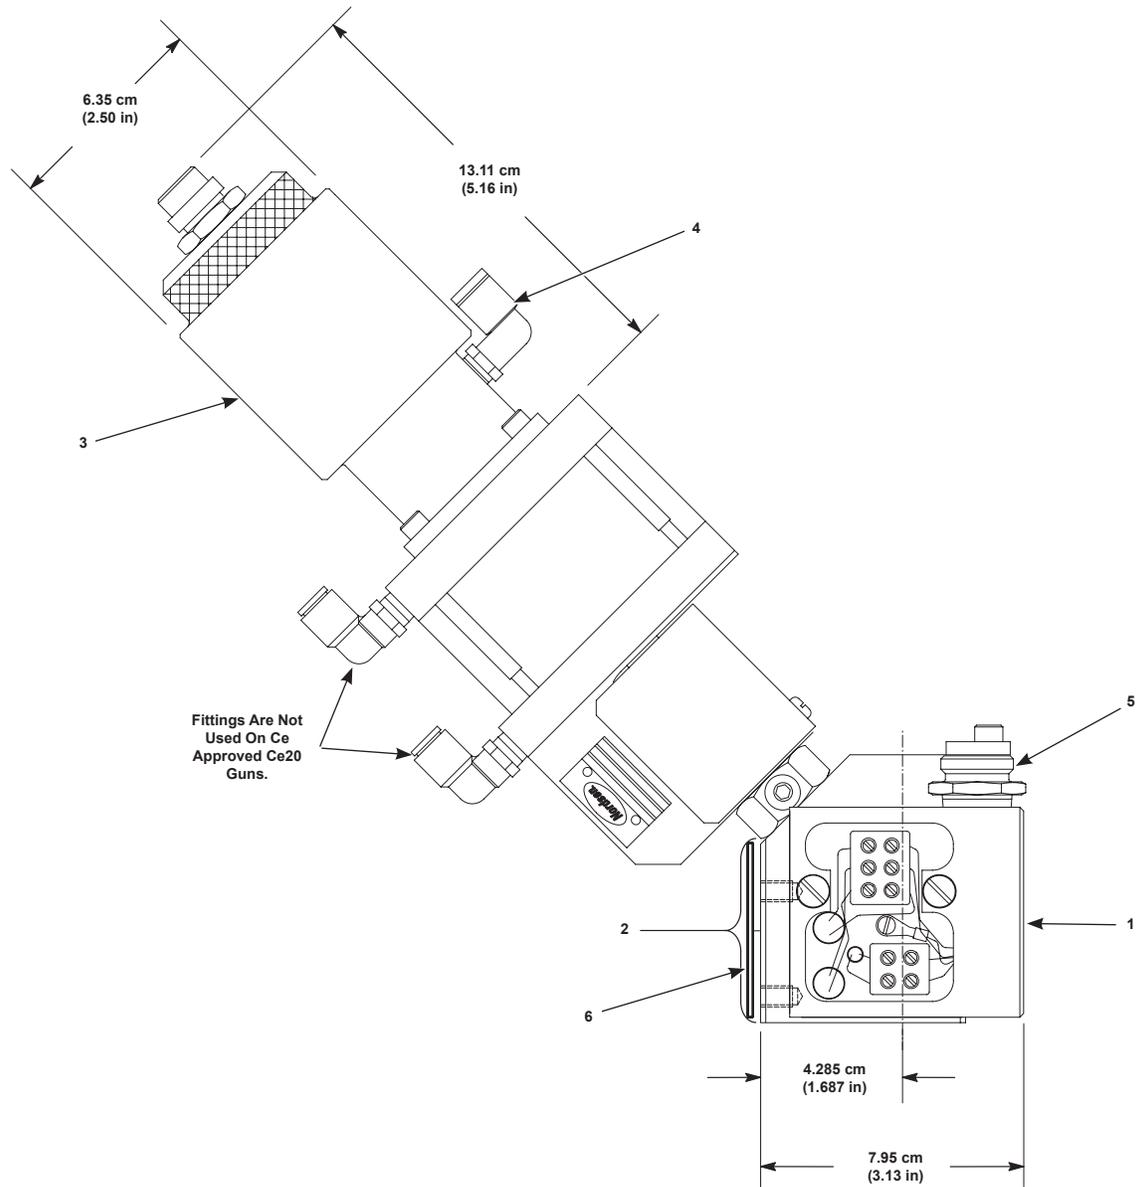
Typical Heated CE20 Gun Dimensions with Spring Closure Assembly Option
